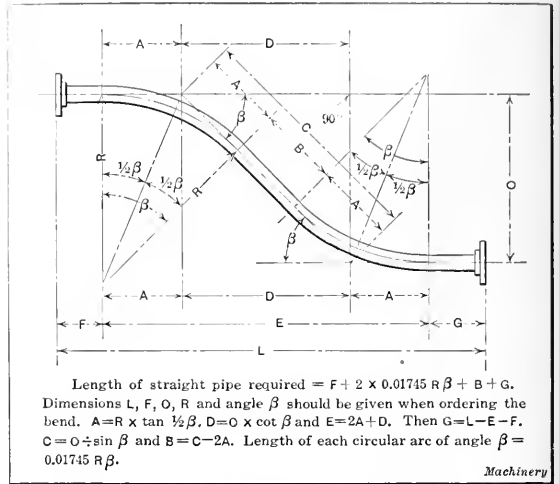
Offset Bend with a Short Straight Section between the Arcs
